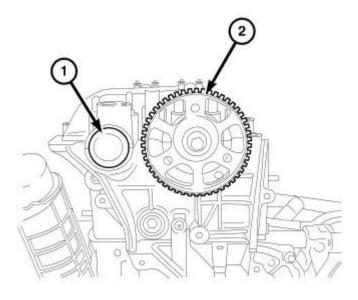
REMOVE/INSTALL CAMSHAFT SPROCKET BOLT Courtesy of CHRYSLER LLC
